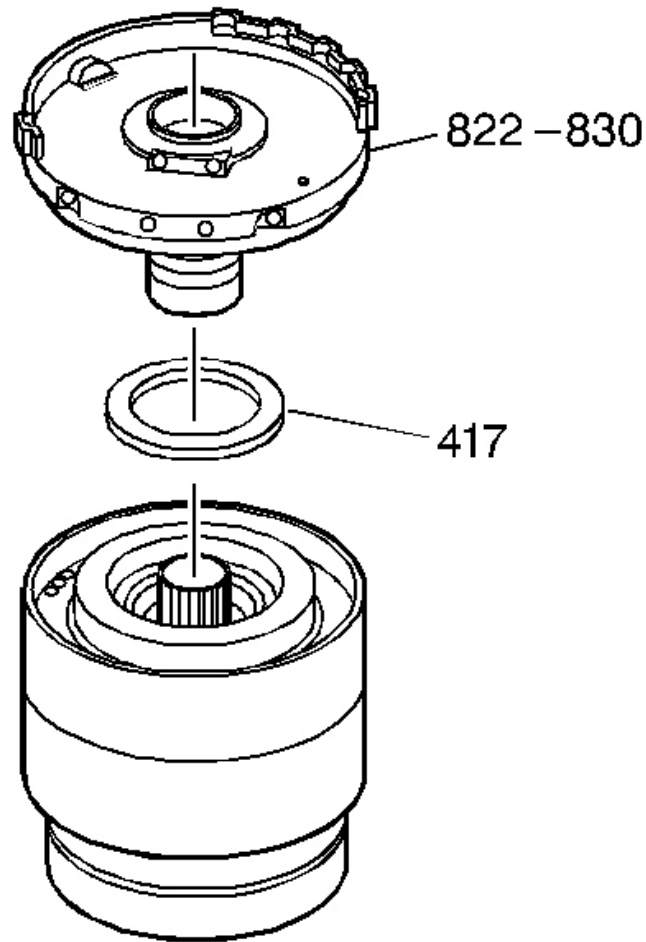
Locating Low Roller Clutch Assembly, Forward And Coast Clutch Support & Thrust Bearing
